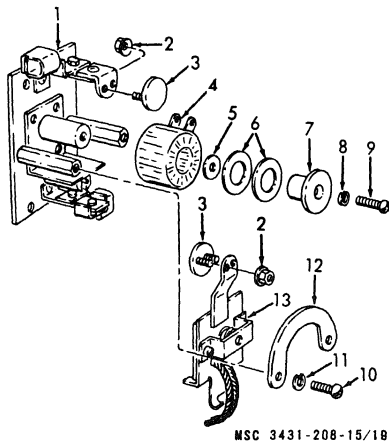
Weld contactor, contactor assembly terminal board, and weld contactor resistor.
